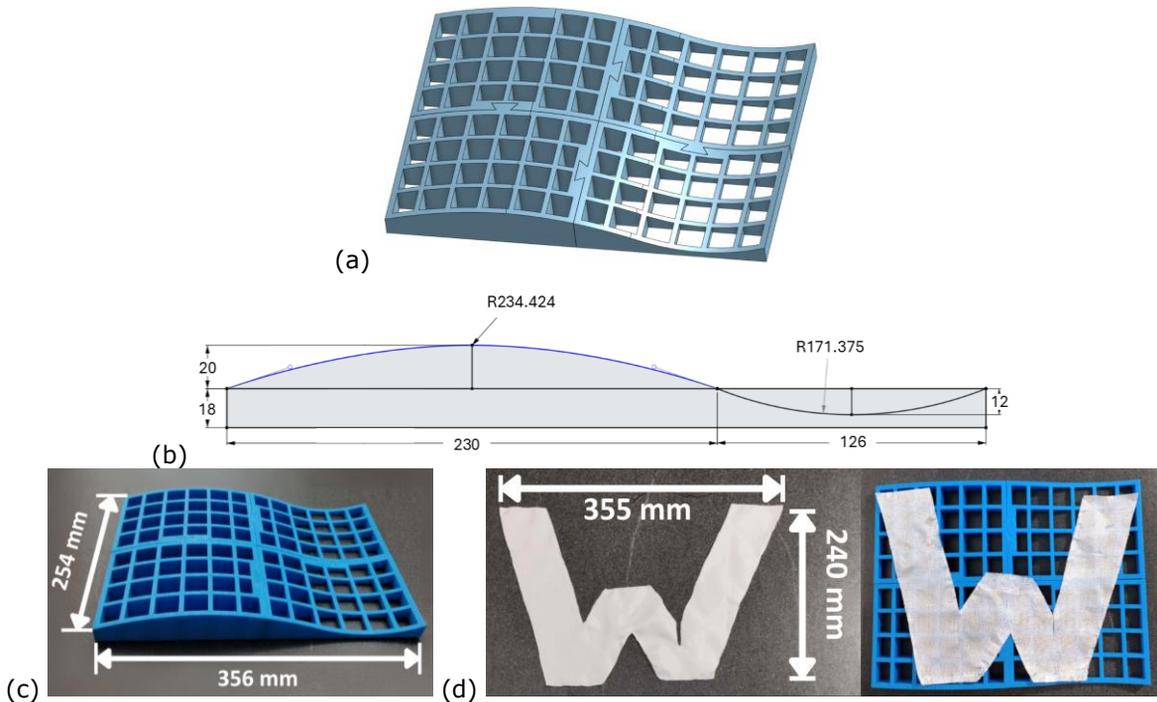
(a) Four-piece CAD model of the mould surface, featuring dovetail joining elements (b) side profile sketch used to generate the mould surface, highlighting key radius dimensions (in mm) that define the non-flat surface curvature (c) assembled mould and (d) dimensions of 'W' fabric with internal slit.
